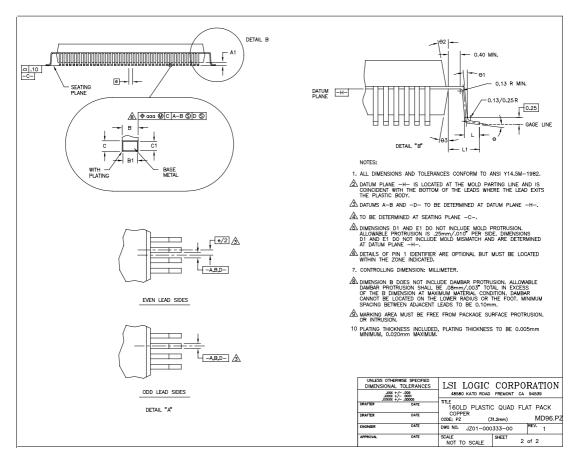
L64021 160-Lead PQFP Mechanical Drawing (Sheet 2 of 2)
